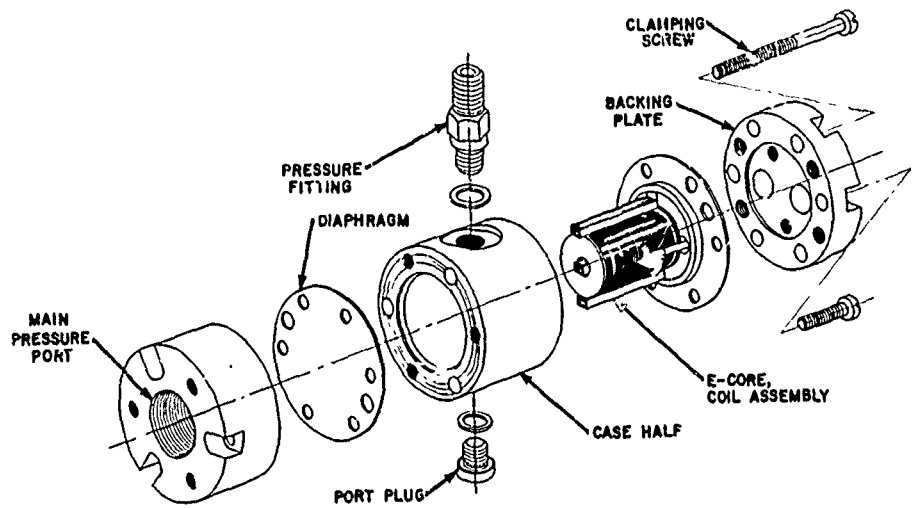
EXPLODED VIEW OF PRESSURE TRANSDUCER
